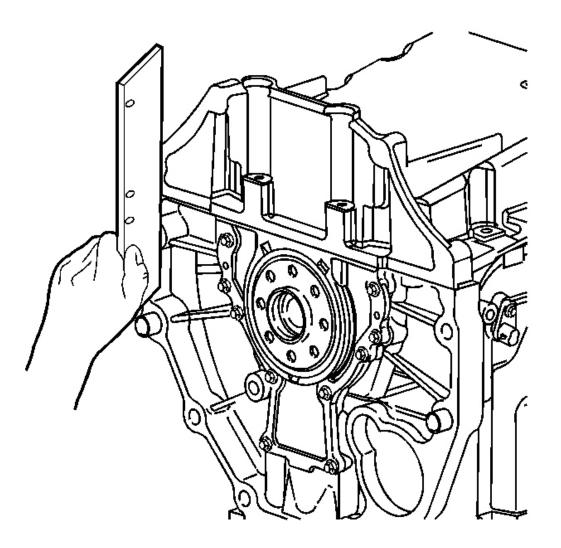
Inspecting Oil Pan Alignment Courtesy of GENERAL MOTORS CORP.
